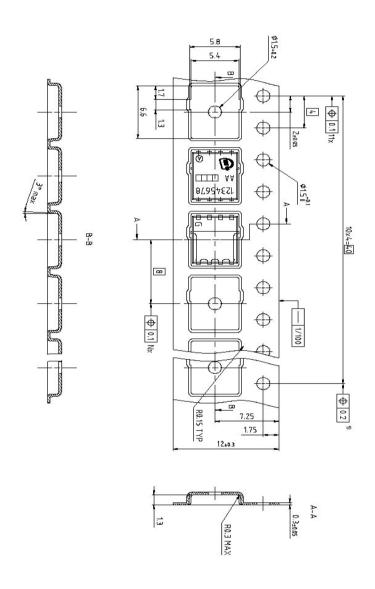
Packaging variant PG-TDSON-8, dimensions in mm
